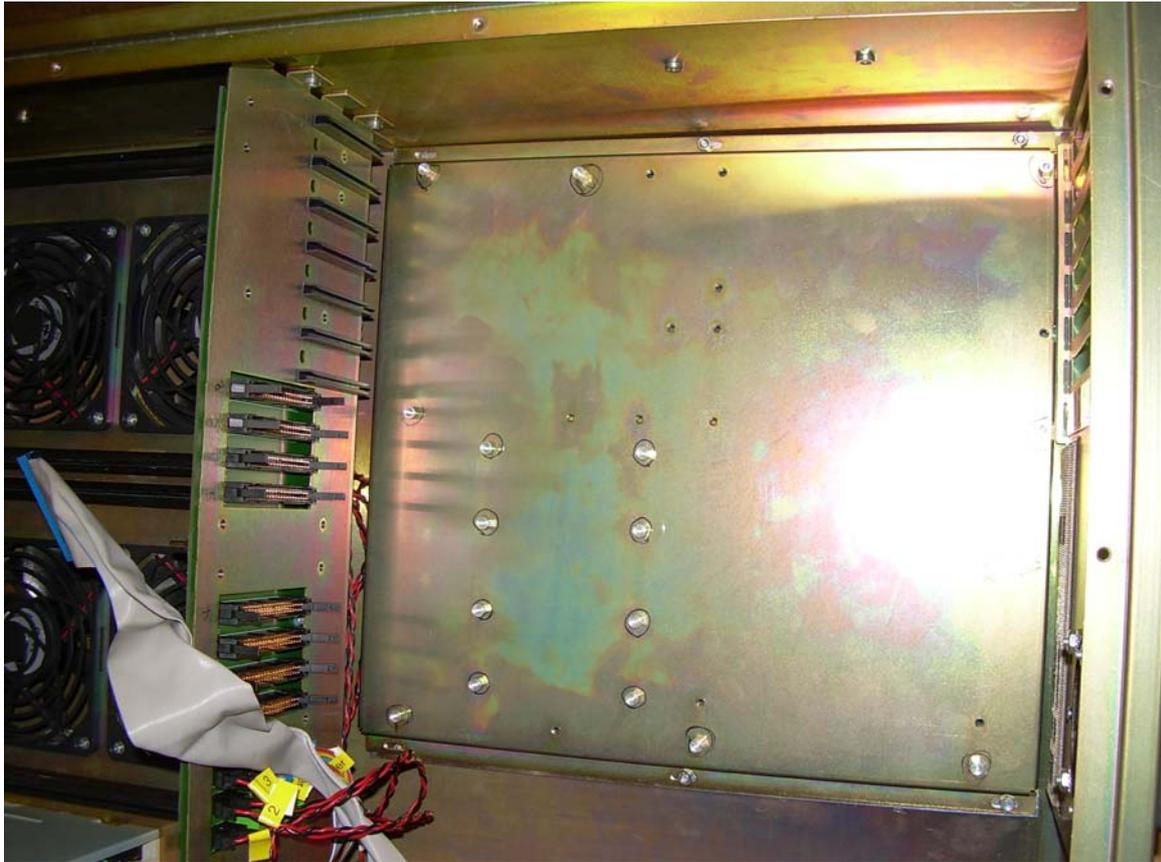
Glue to fasten support frame to bottom of Mark5
